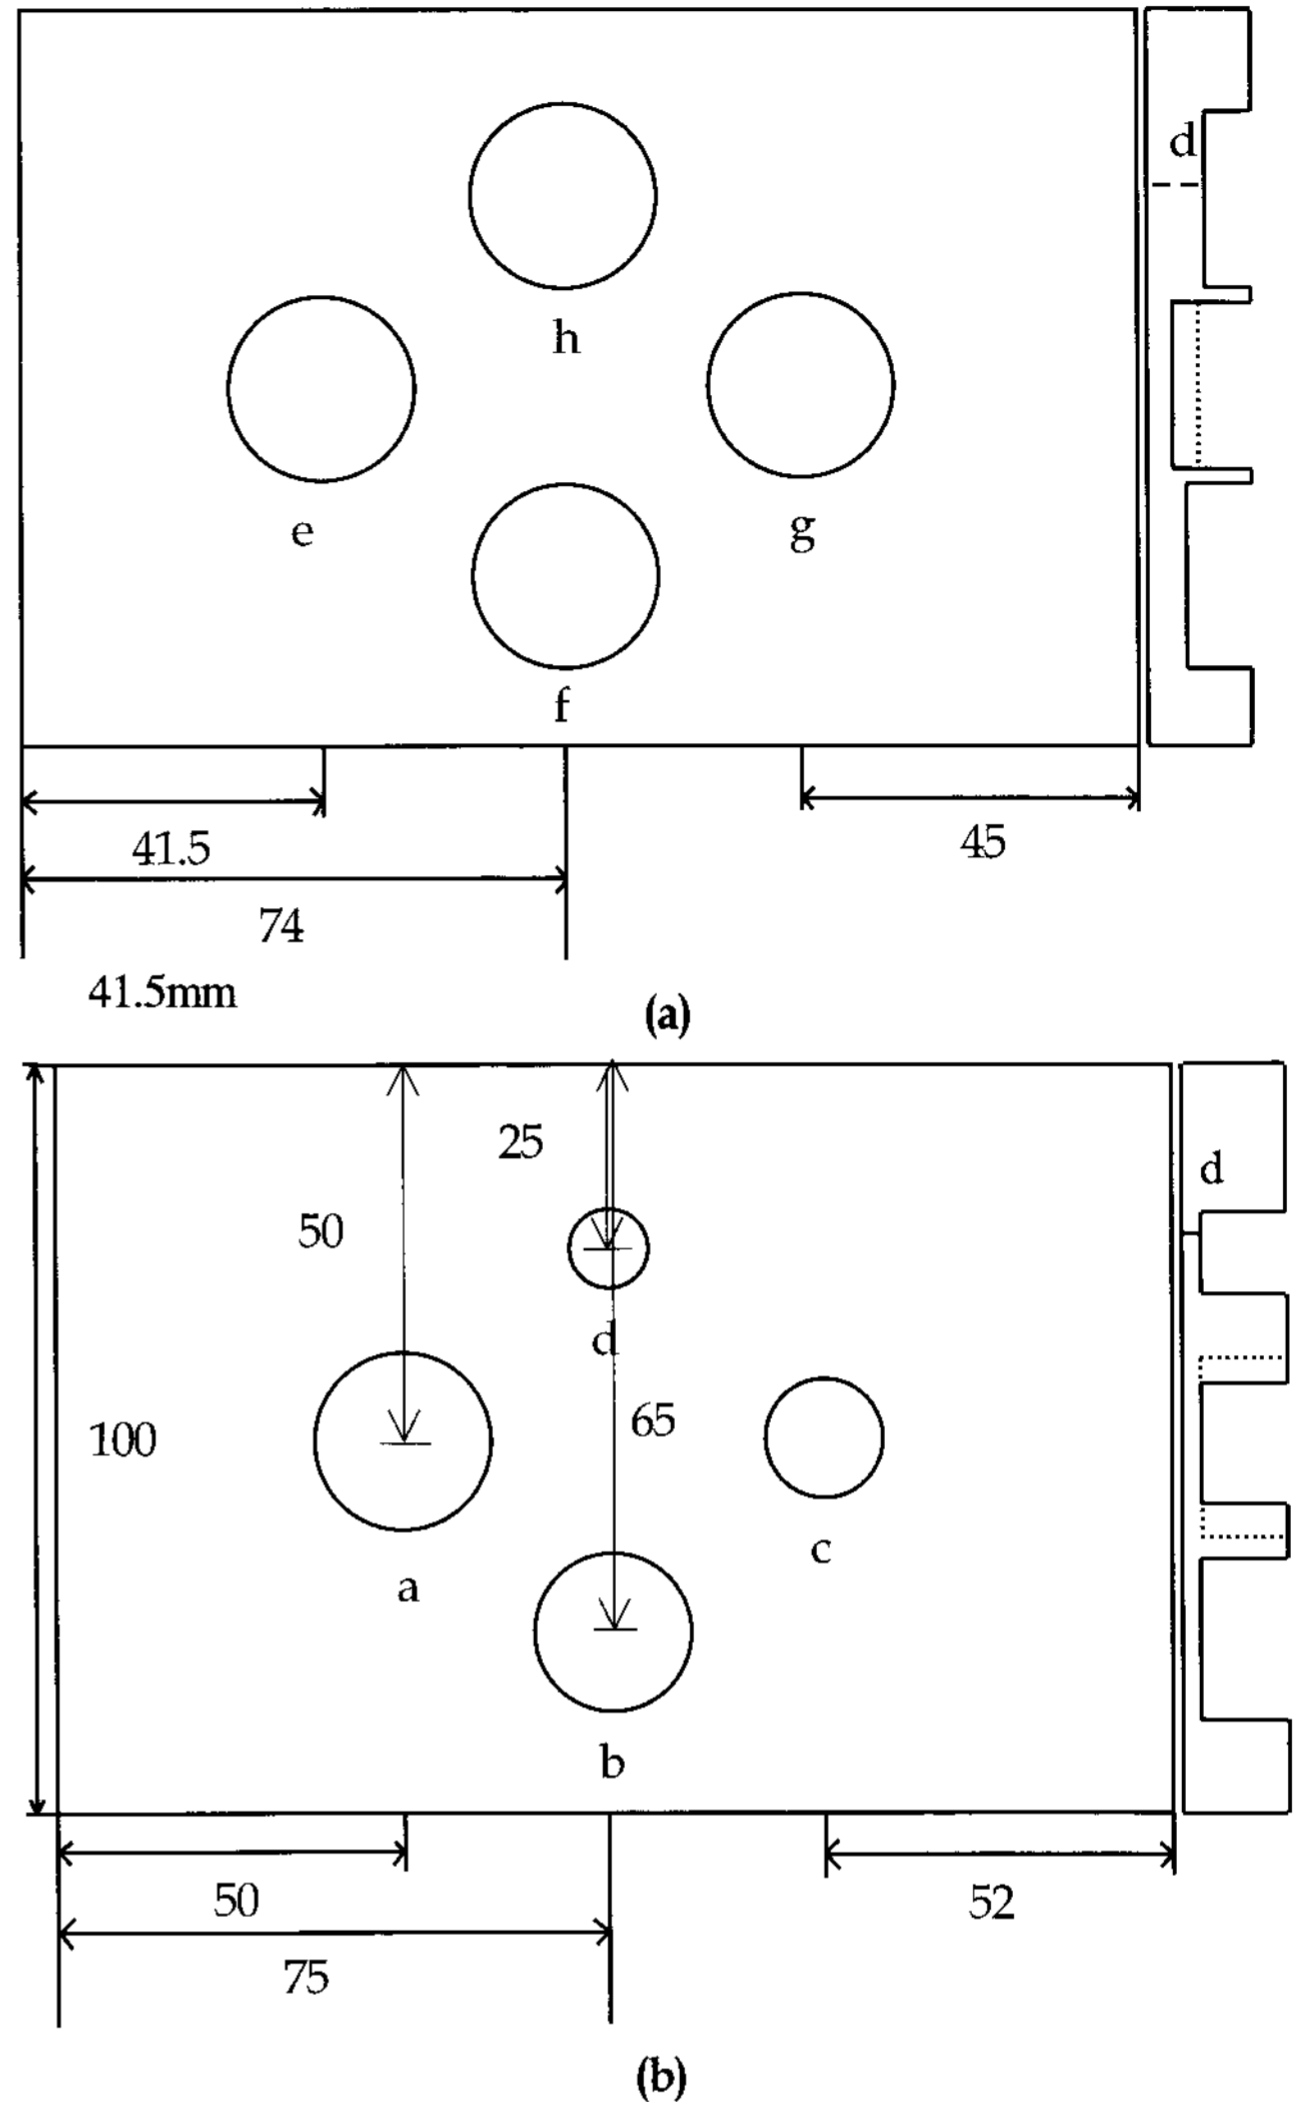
Geometry of specimens(unit: mm): (a) specimen I, (b) specimen II
